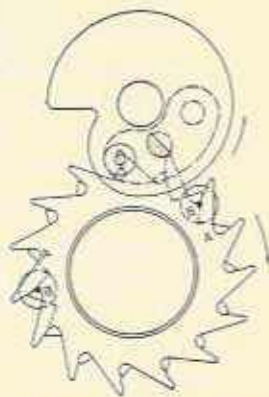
The contact wheel and index wheel are shifted by the jewel side of the gold-jewel pin on the balance.
